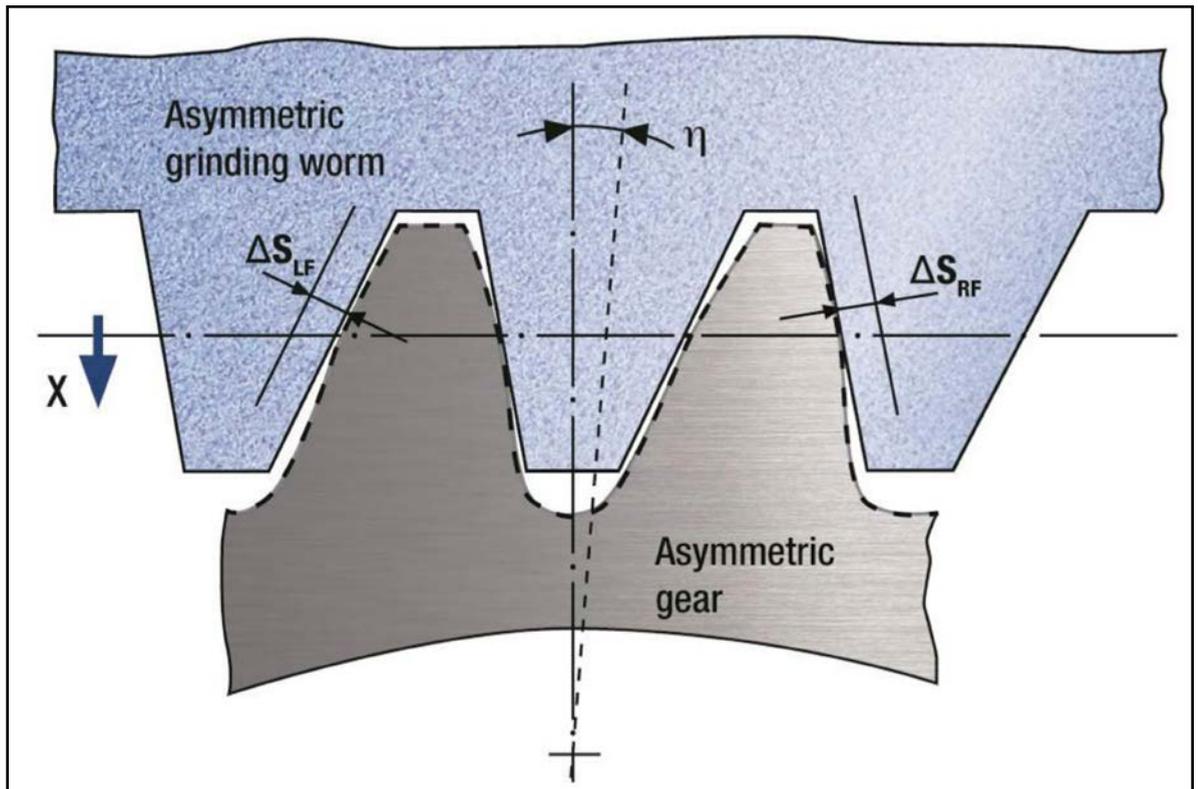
Modified centering of an asymmetric gear and grinding worm.
